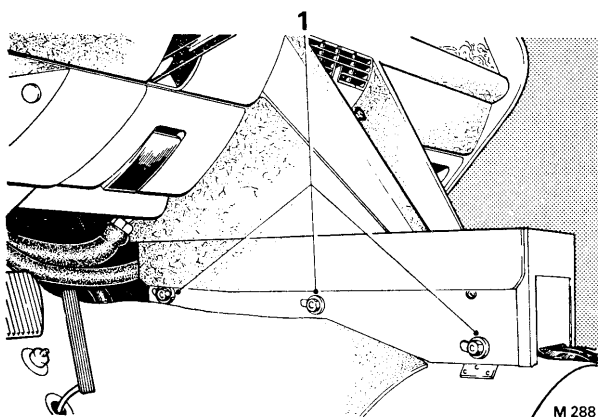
POSITION OF THE CENTRE CONSOLE MOUNTING SCREWS (4-Door Saloon and Long Wheelbase Cars)
